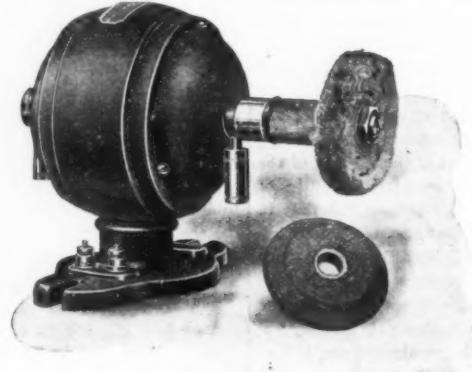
NEW SMALL ELECTRIC TOOLS.
